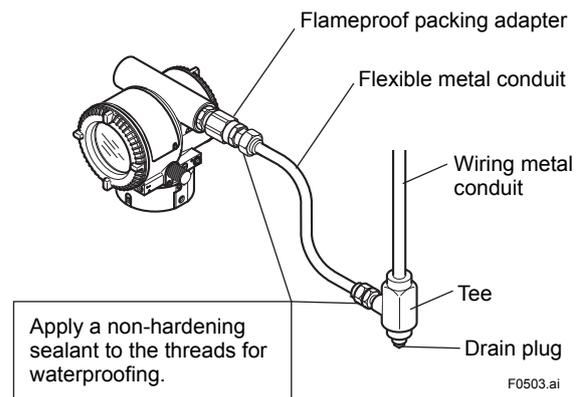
Typical Cable Wiring Using Flameproof Packing Adapter
